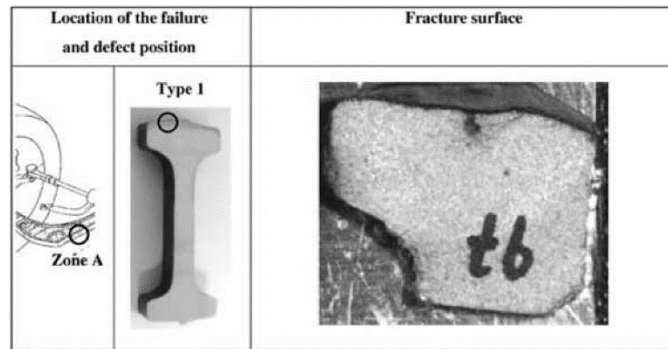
Fracture surface of failed control arm showing the presence of oxides at the surface [42].
